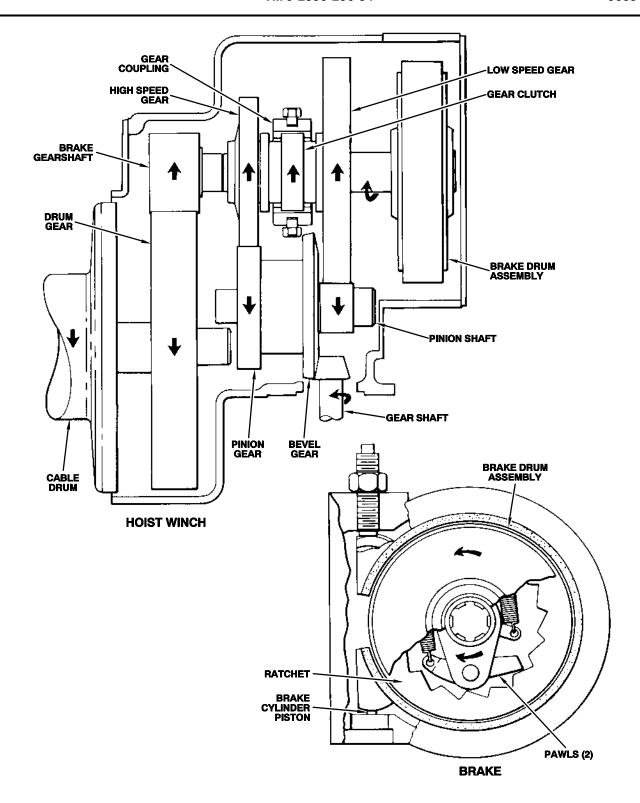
Hoist Winch Assembly—Cross-Sectional View.
